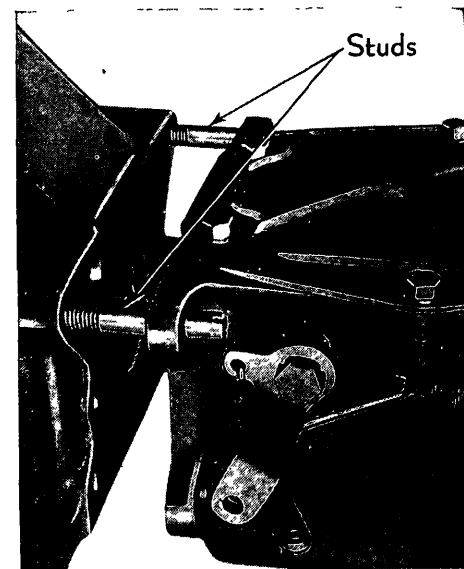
Use of guide studs in transmission mounting holes when removing and installing sync mesh transmission, 1939-52
